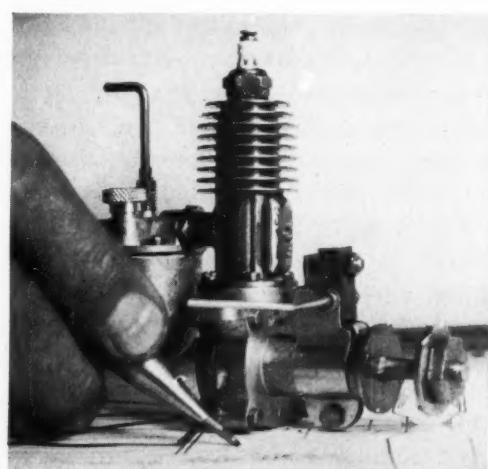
Front view of miniature engine, propeller assembly being mounted on pin at right
